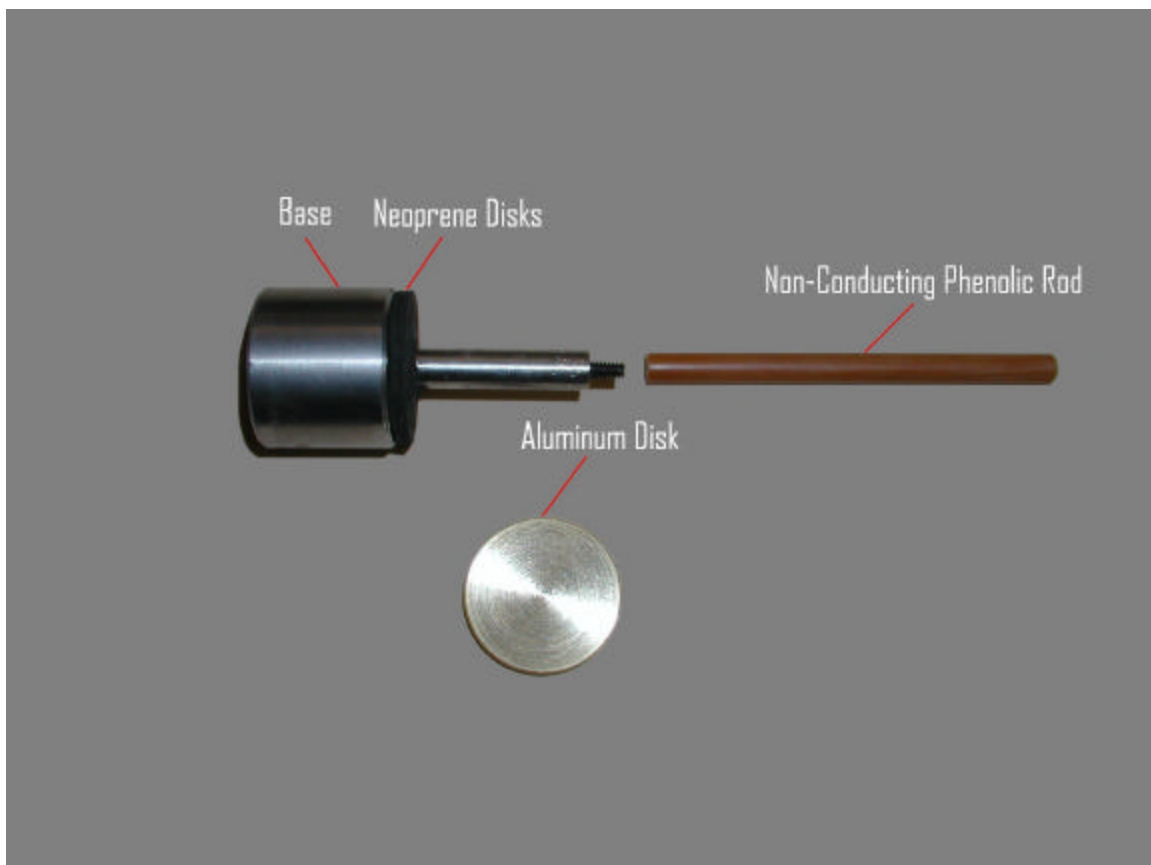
Pusher Assembly with Aluminum and Neoprene disks
